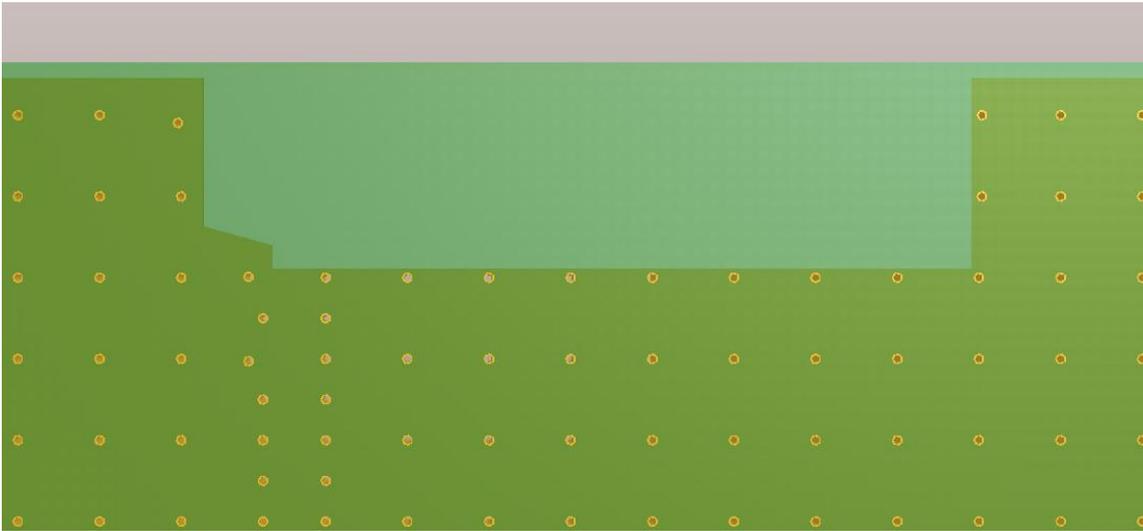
Layout of the Ethertronics 1001013 antenna (PCB bottom view)
